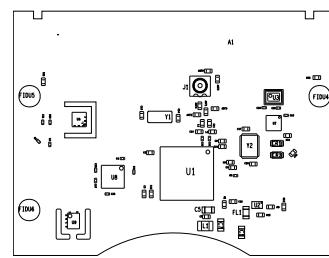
Assembly Drawing 2 (Bottom Side Mirrored)
